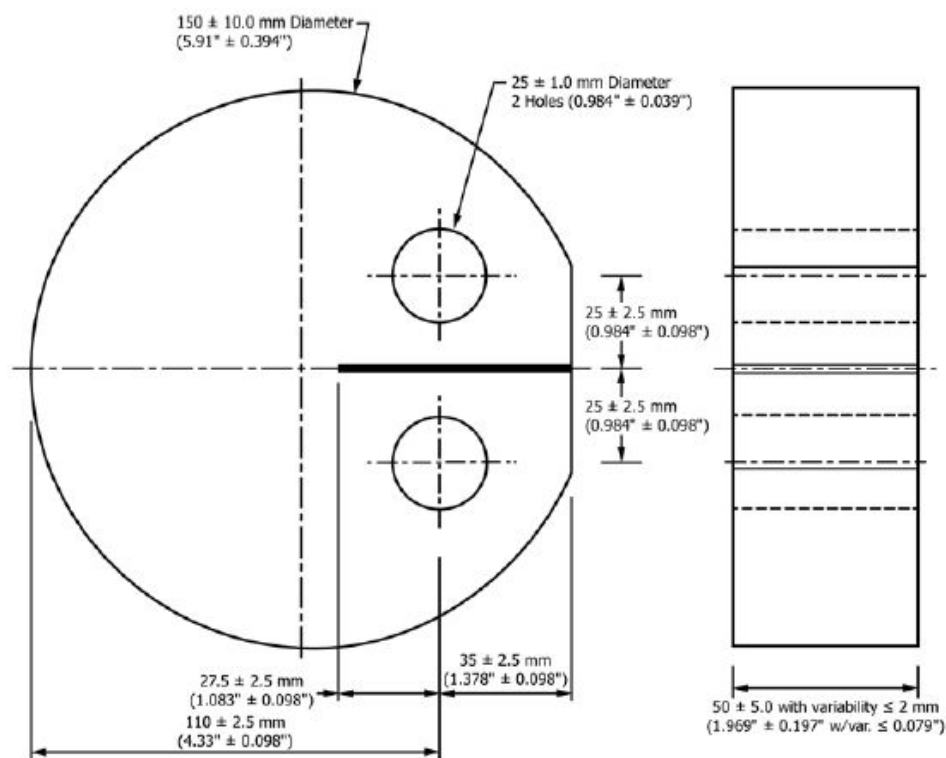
ASTM Standard DCT Specimen Dimensions (ASTM D 7313)
